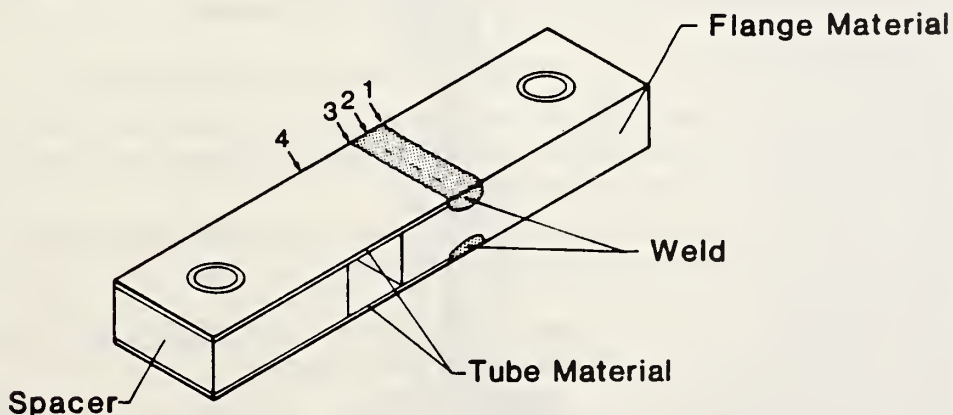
Schematic diagram of the specimen showing the four notch locations: 1 - flange HAZ; 2 - weld; 3 - tube HAZ; 4 - tube.
